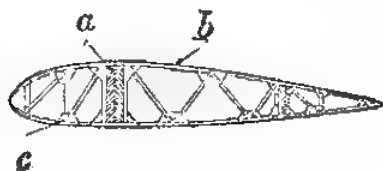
Truss type rib used in the XL-14 MAYA. a, laminated main spar; b, wood cap strip; c, hard paper gusset.
